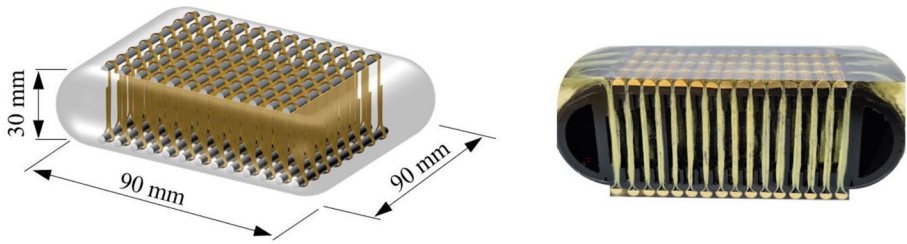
Dimension of the investigated pressure vessel concept (left) and cross section of prototype without liner (right)
